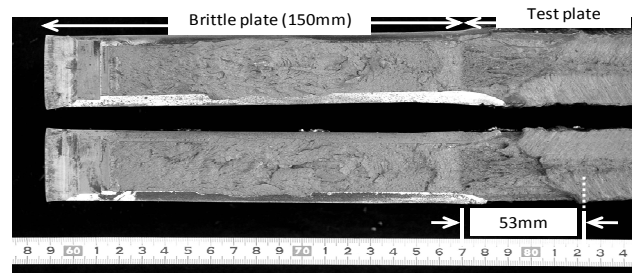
Fracture surface appearance of a duplex ESSO test specimen (Welded joint, -196°C, 294MPa).
